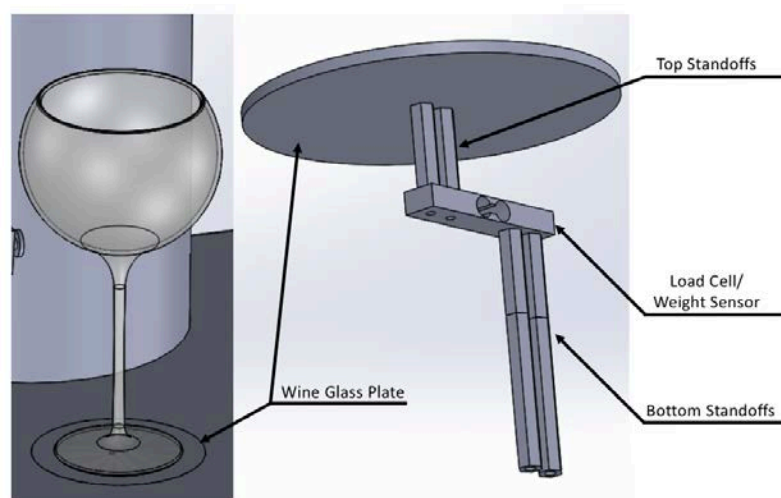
Wine Glass Plate/Weight Sensor Components
